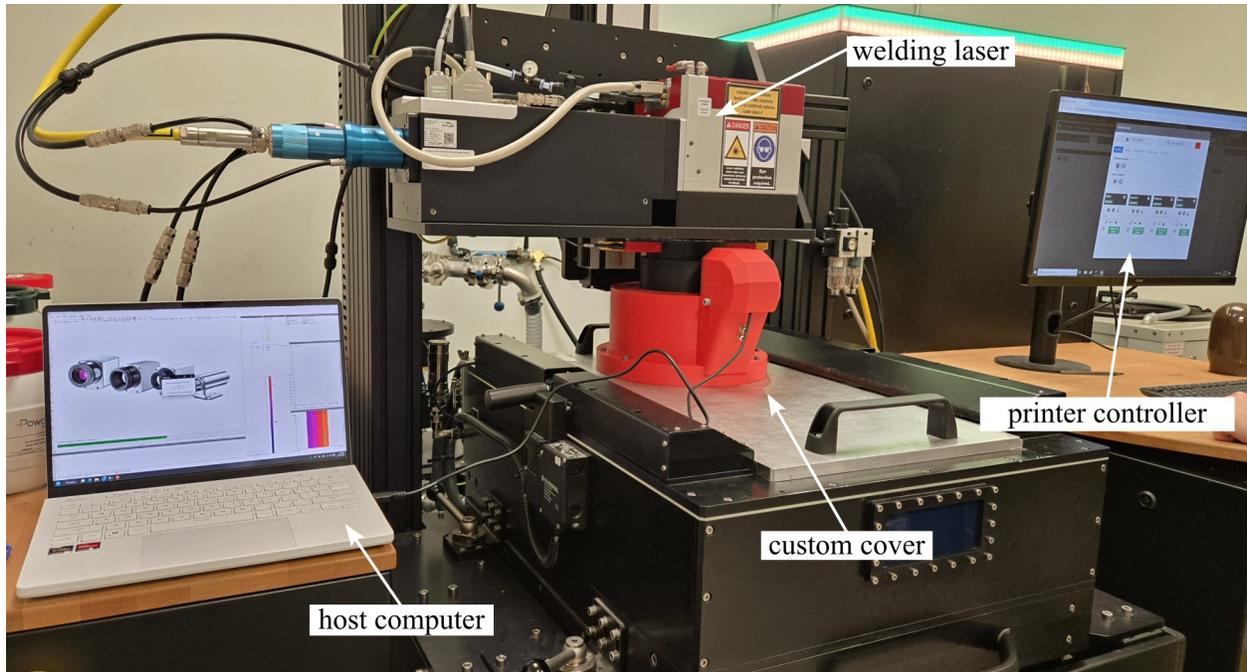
Test fitting and seal testing of a custom cover on the Aconity machine.
